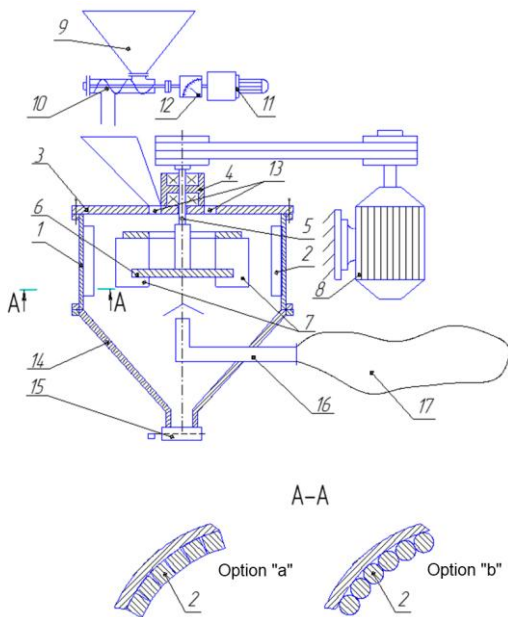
Scheme of the plant for the study of impact-centrifugal mill. 1 – mill body; 2 – reflective rods; 3 – cover; 4 – bearing unit; 5 – shaft; 6 – disk; 7 – blades; 8, 11 – electric motor; 9 – hopper; 10 – feeder; 12 – reductor-regulator; 13 – holes; 14 – collector; 15 – shutter; 16 – tube section; 17 – filter sleeve
